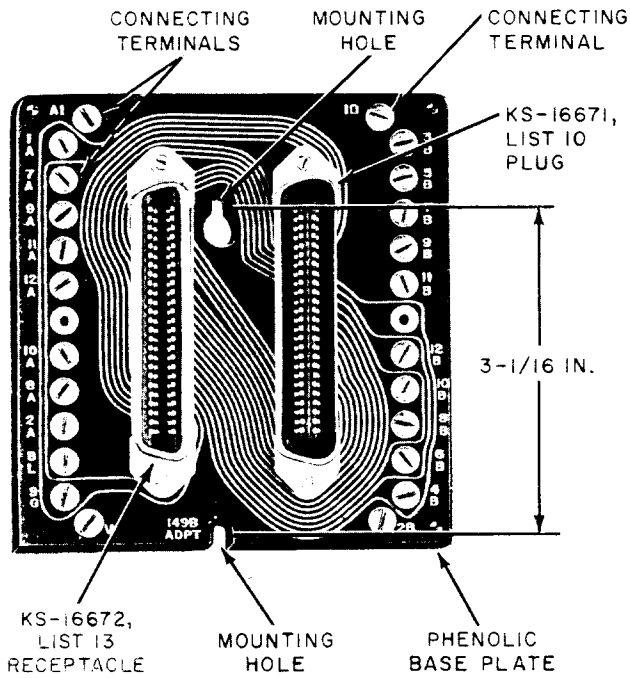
149B Adapter, Printed Wiring Board Assembly
